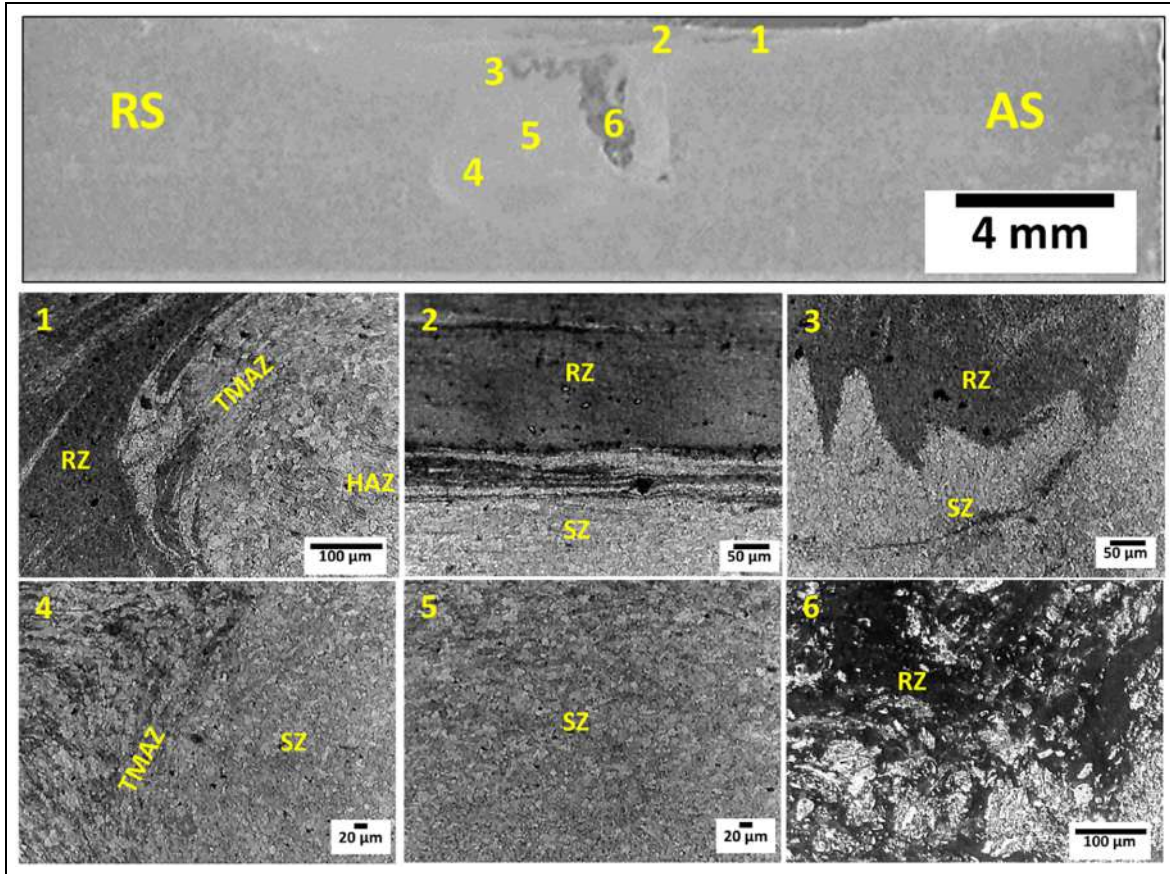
Macroscopic image of sample SP3 and several locations of the welding zone.
